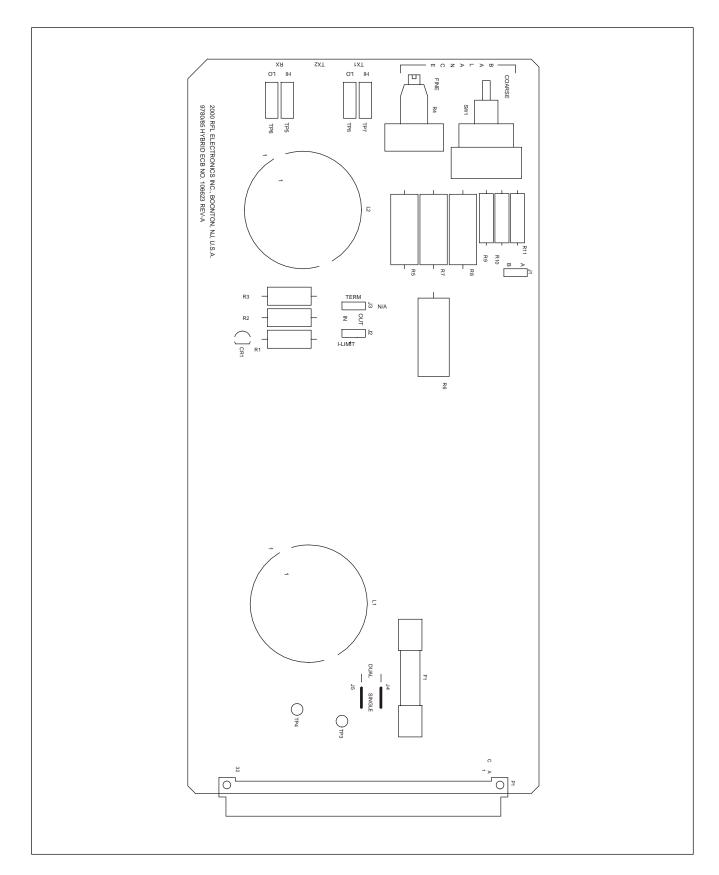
Component locator drawing, RFL 9780 Skewed Hybrid Module
